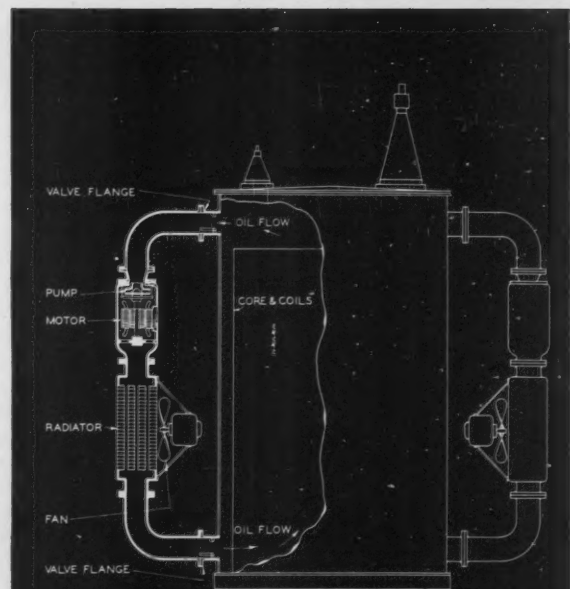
Oil-immersed motor drives pump that circulates oil through an oil-air heat exchanger. Blower forces air through radiator.
